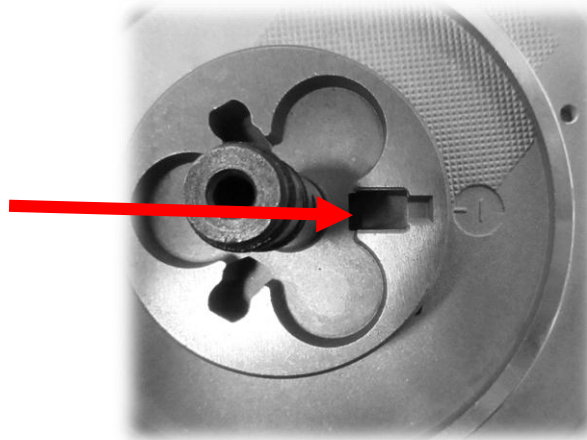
Pin drive slot pointing at #1 indicator marking.
